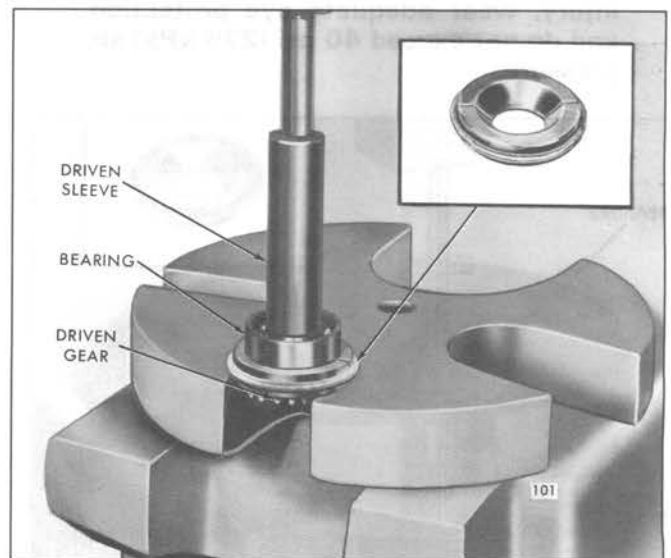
Removing Driven Sleeve and Bearing from Driven Gear
